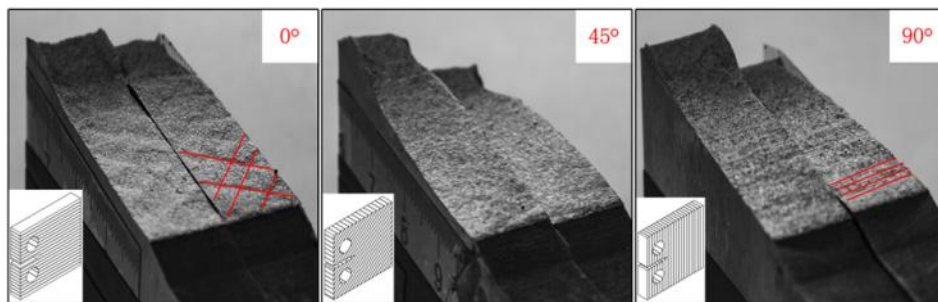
Fracture surfaces of different build direction samples
